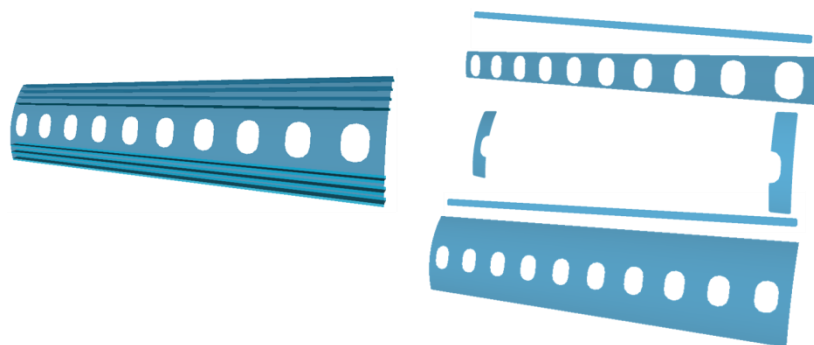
A skin panel bonded by several aluminum sheets (exploded view)
